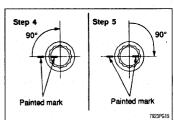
To ensure that the bolts are tightened exactly 180 total degrees, mark the head bolt and cylinder head as shown— 1.6L and 2.0L DOHC engines
